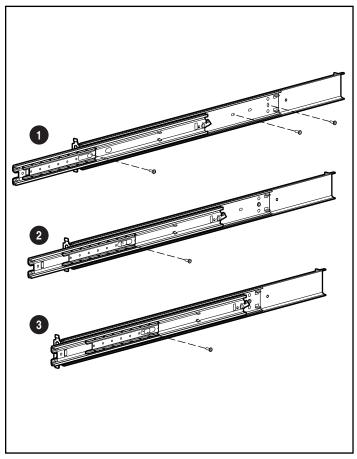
Attaching the sliding bracket rails to the rack mounting brackets
